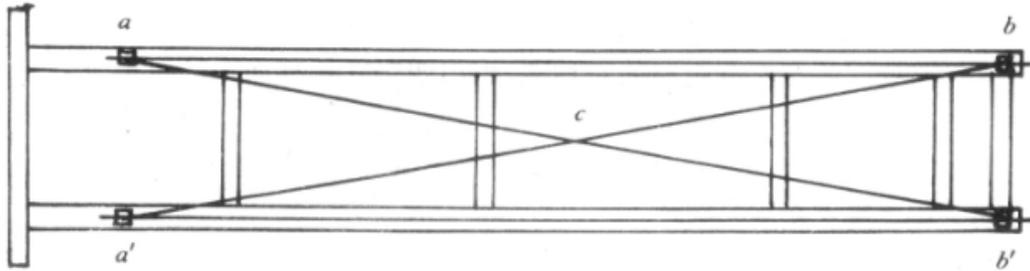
3 Planarity testing on longitudinal beam of the frame
